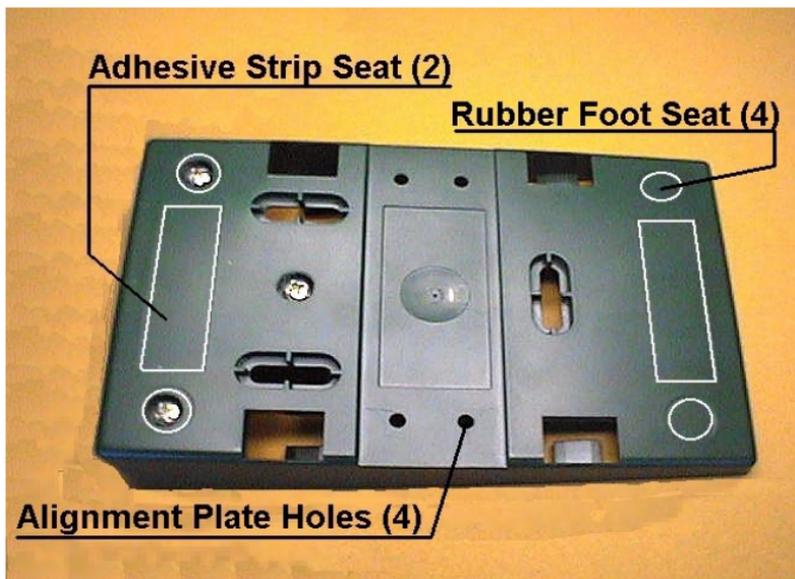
OM-DRAGON™ Mounting Base bottom view
